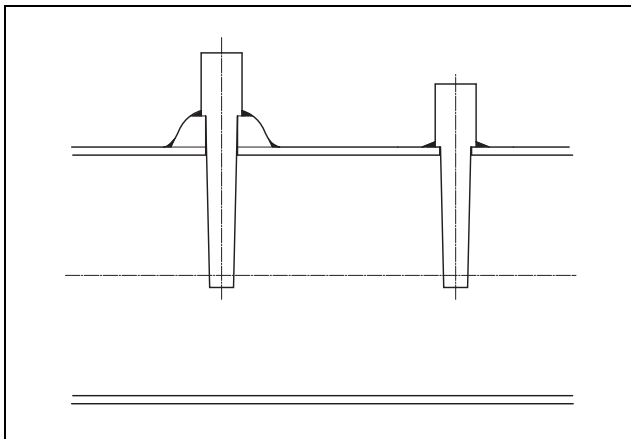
Installed socket-weld and weld-in thermowells
